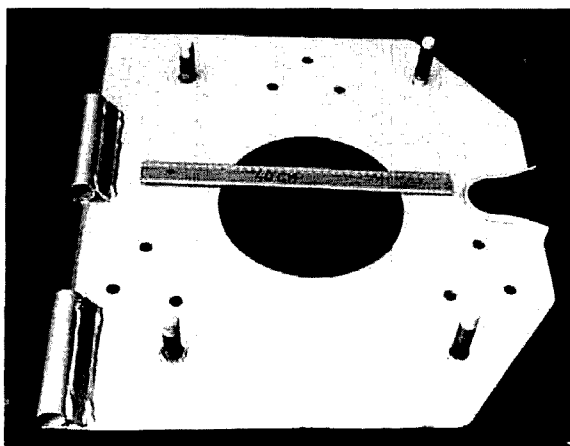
Upper hinge plate, made of 23/64-inch (9-mm) steel. The four bolts, welded on, keep the hinge plates together when the tower is upright. (Weight: 50 pounds/22.5 kg).
